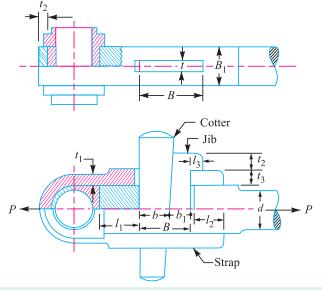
Gib and cotter joint for strap end of a connecting rod.
